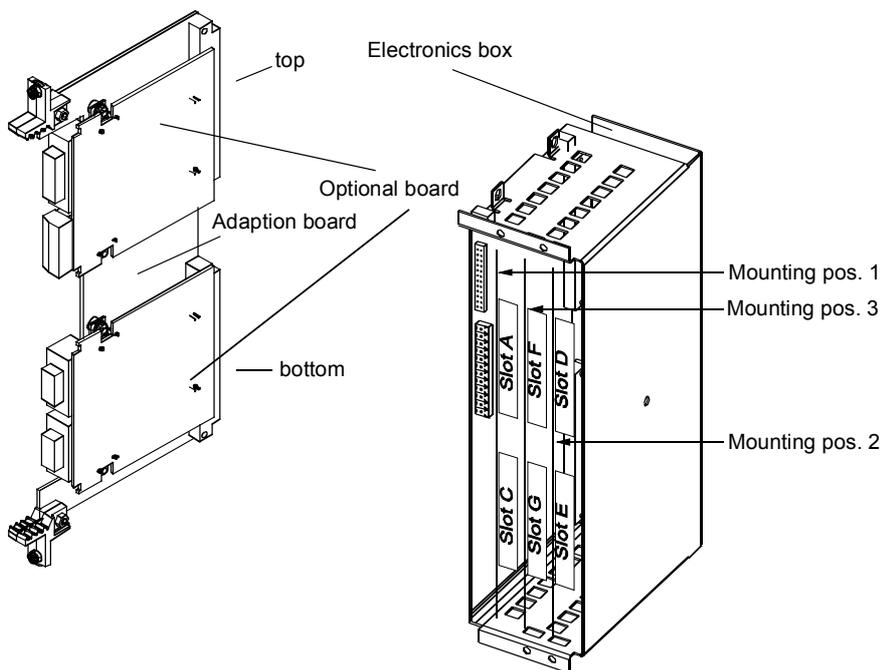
Adaptation board with optional boards and position of the slots for Compact units and chassis-type units
